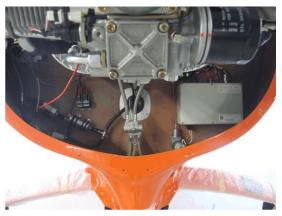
Rear Wall 'Installation Wall' (Fire Wall removed)
